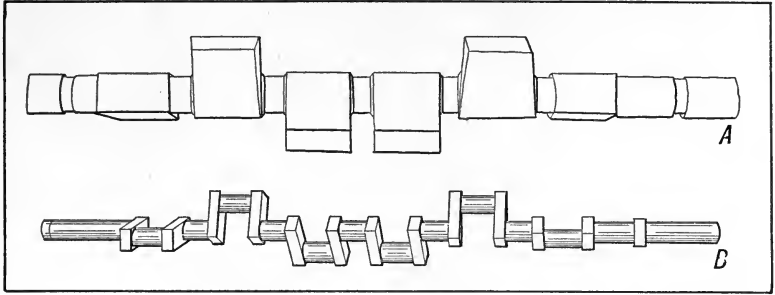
Showing Method of Making Crank Shaft. A—The Rough Steel Forging Before Machining. B—The Finished Six-Throw, Seven-Bearing Crank Shaft.
